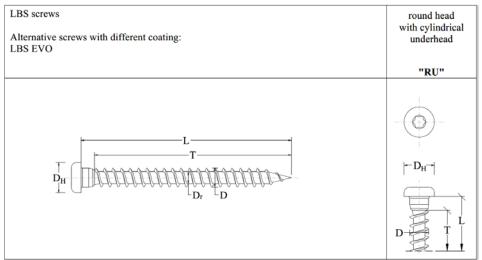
LBS TYPE FULLY THREADED SCREWS
